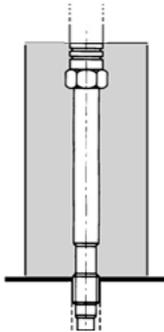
Mounting example for Pressure Transmitter with flexible stem
